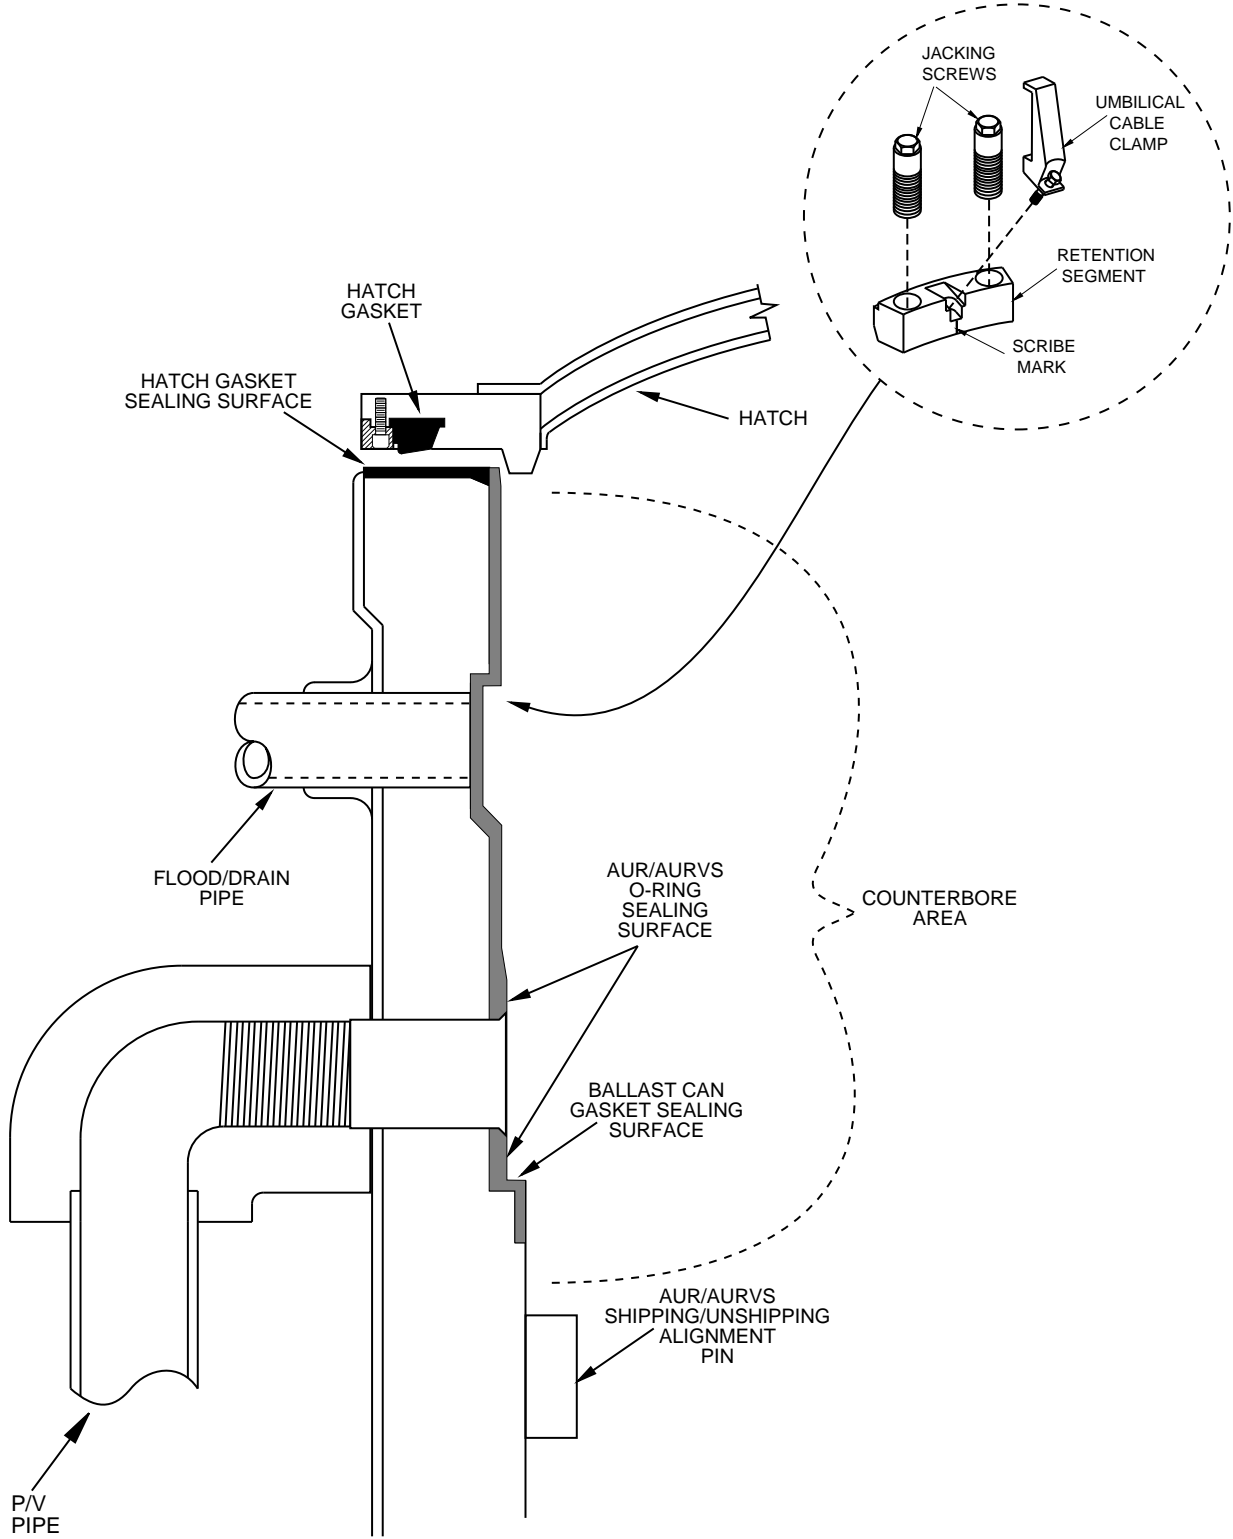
Missile Tube Assembly (Cut-Away)
